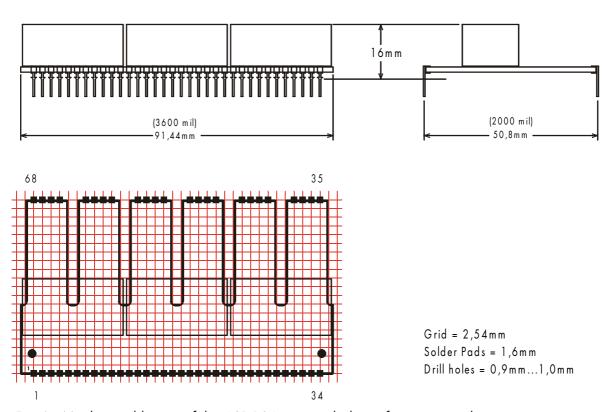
Mechanical layout of the 6SD106 six-pack driver for econopack
